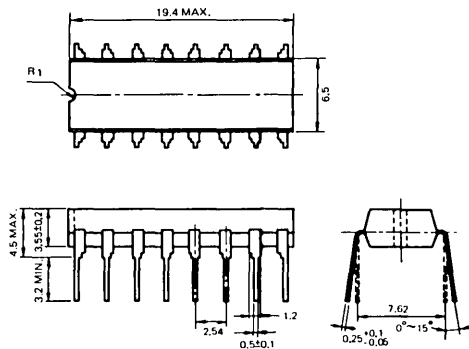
Package Dimensions of the μPC1235C (Unit: mm)
